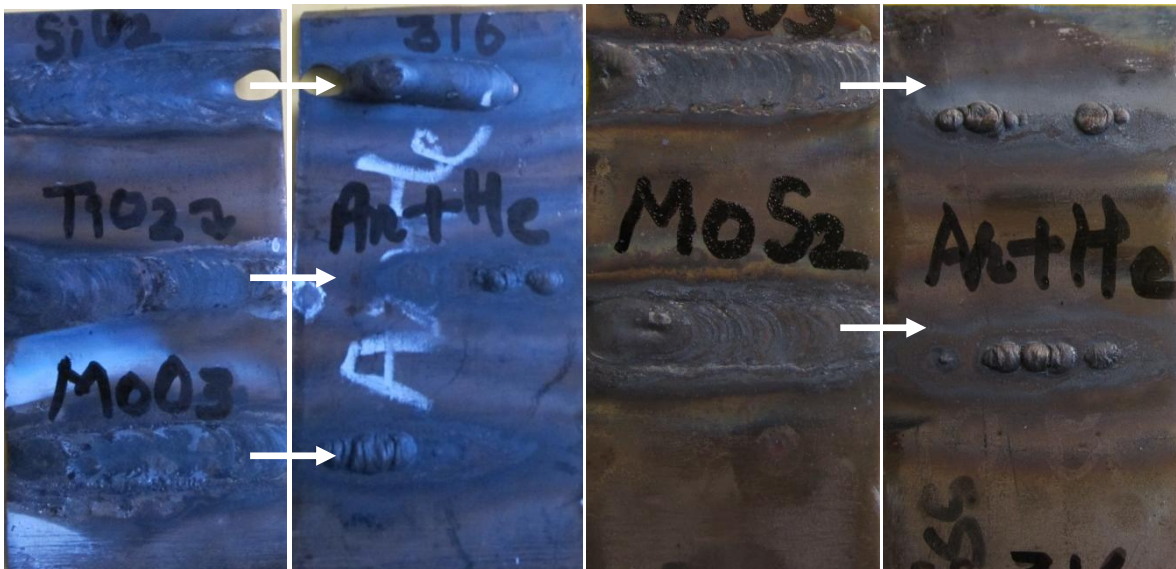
Weld bead appearance (top, bottom surface) of A-TIG with five different fluxes for AISI 316 workpiece (125 A, Ar 70% + He 30%, flow rate 10 L/min)
